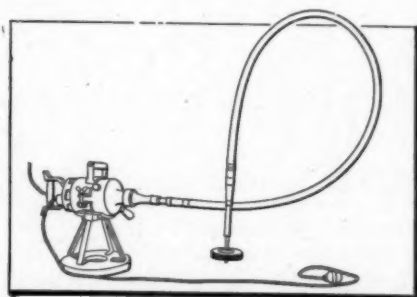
Showing the Pioneer tool used as a polishing-grinding tool for small parts and inaccessible places. An extended switch is supplied
